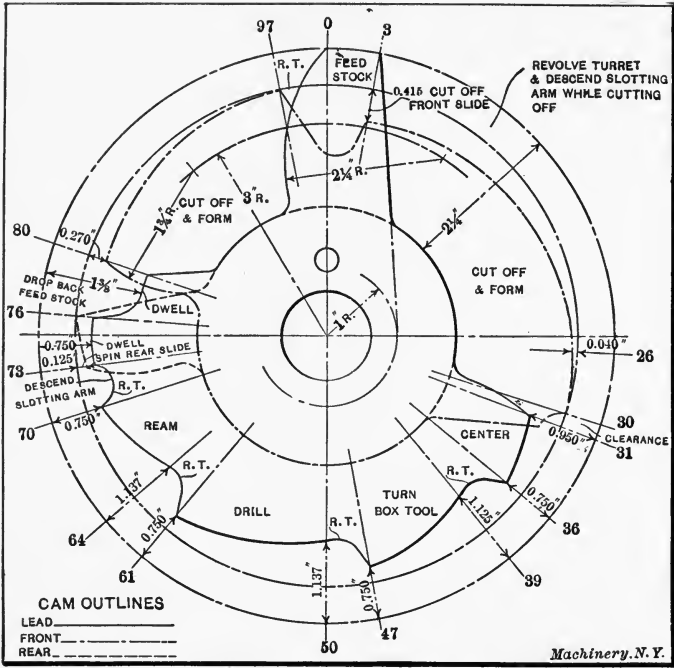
Cams used for Making and Assembling a Grooved Roller and Socket Joint
